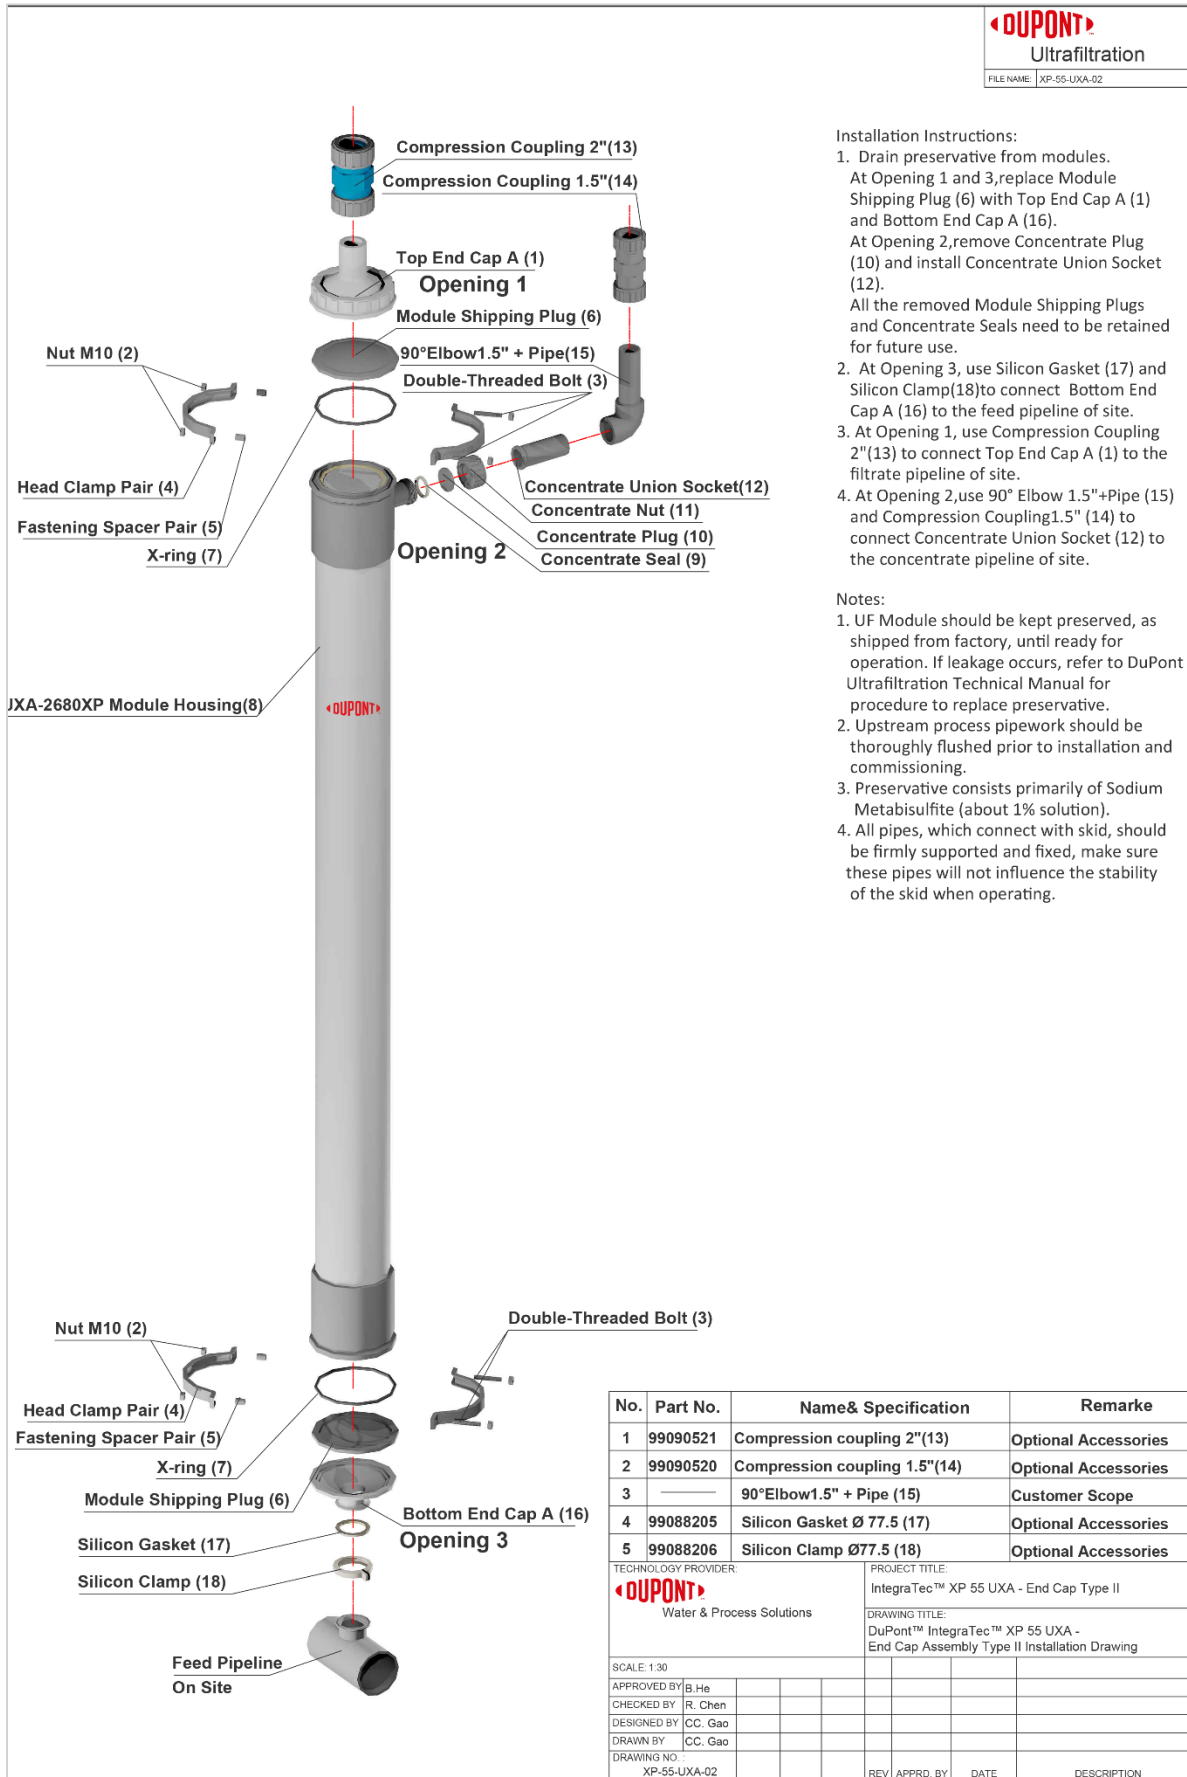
DuPont™ IntegraTec™ XP 55 UXA - End Cap Assembly Type II Installation Drawing
